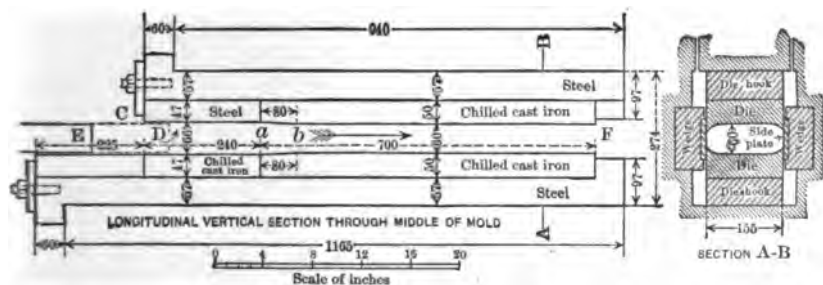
Vertical sections through mold box of lignite-briquetting press; dimensions are in millimeters.
